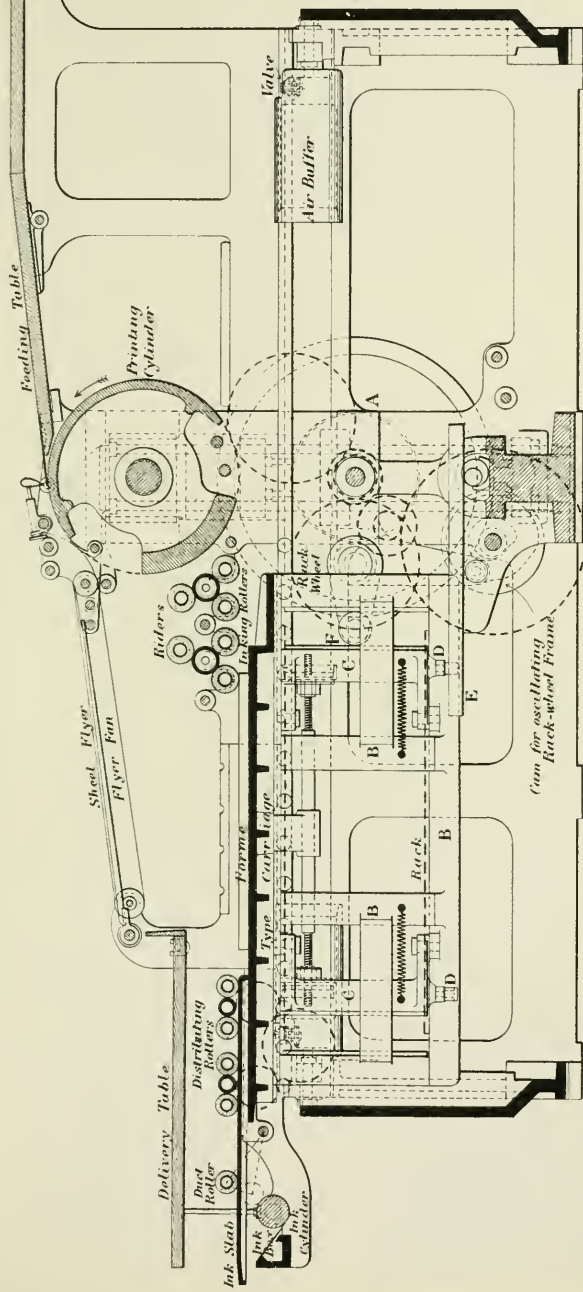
Two-Revolution Single-Cylinder Printing Machine.
